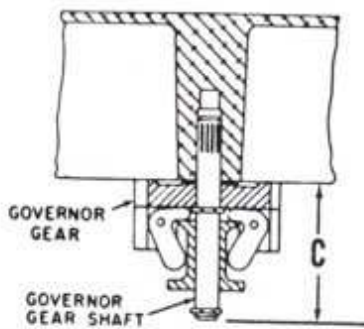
Governor gear and shaft installation on Models VH80 and VH100. Dimension (C) is 1 inch (25.4 mm).
